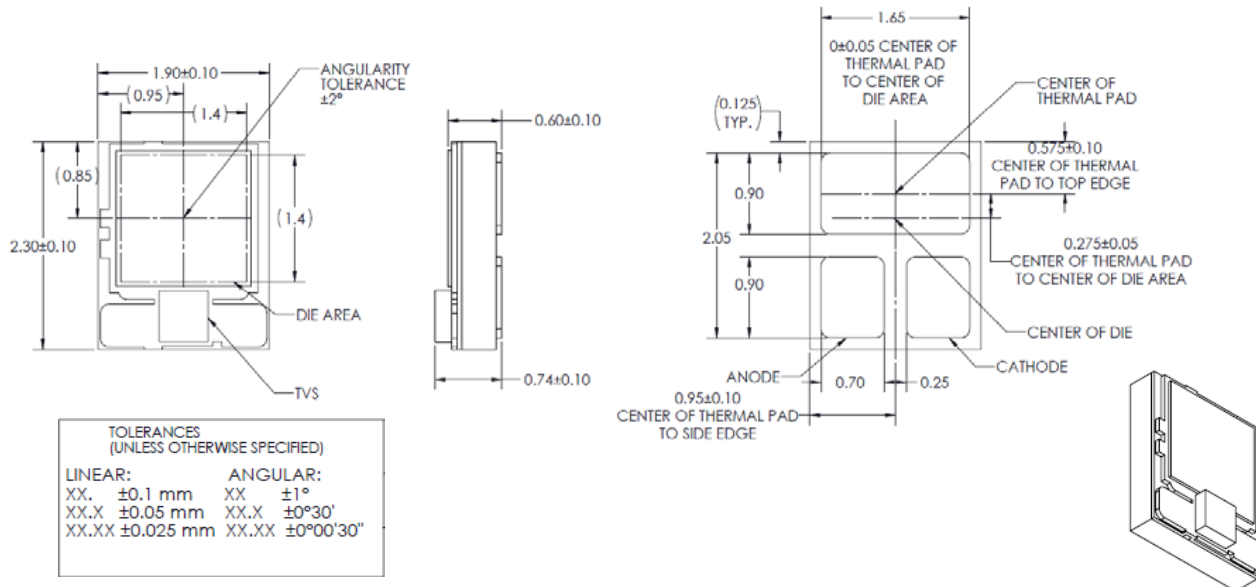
Mechanical Dimensions for LUXEON F ES Cool White.
